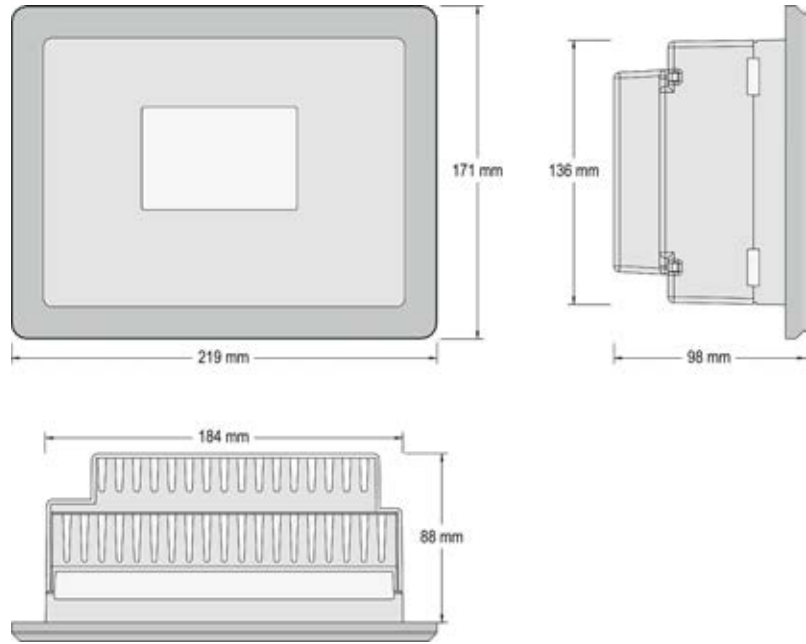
Plastic housing - dimensions (easYgen-2500)
